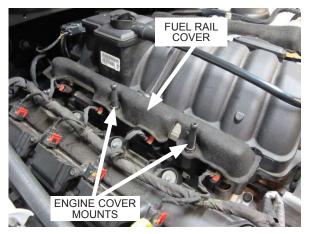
d: Remove fuel rail covers, engine covers, and engine cover mounts (Passenger side shown)
